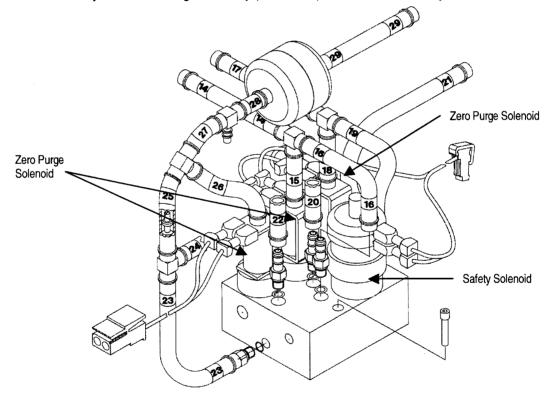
Safety Solenoid/Zero Purge Assembly (P/N 15652
